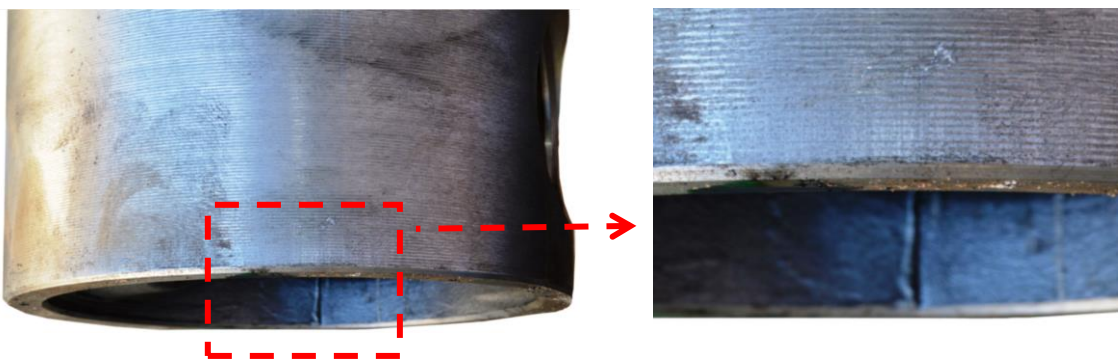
Photo (by Author) of Piston Skirt Showing Original Machining Marks
